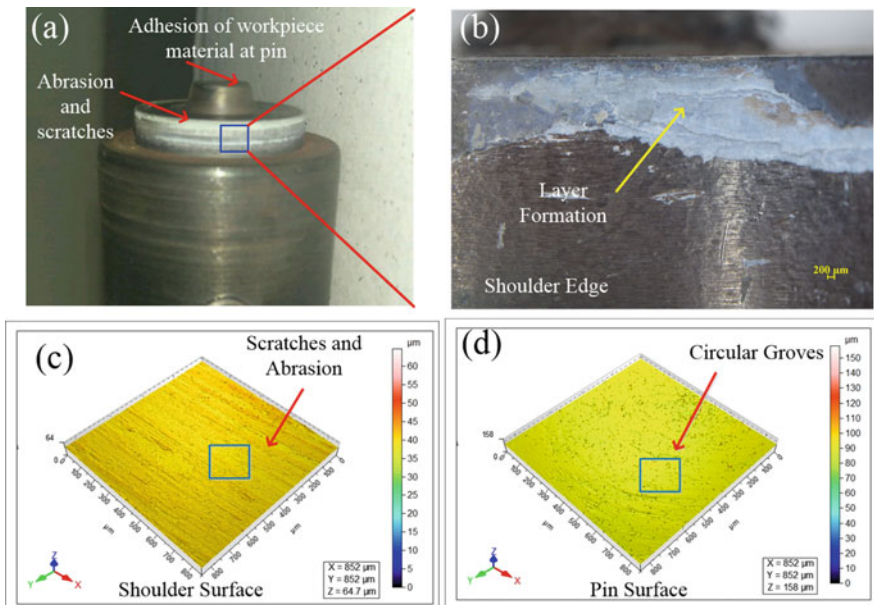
a Tool photograph after performing welding, b surface roughness at the tool shoulder, and c tool pin
